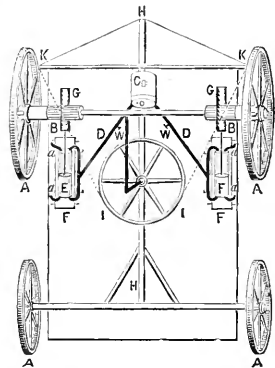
READ'S STEAM-CARRIAGE, 1790.
